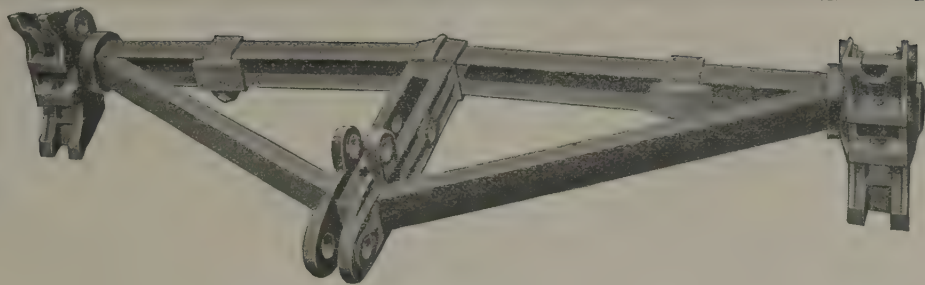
Huntoon Standard Brake Beam for Six-Wheel Passenger Car Trucks.
